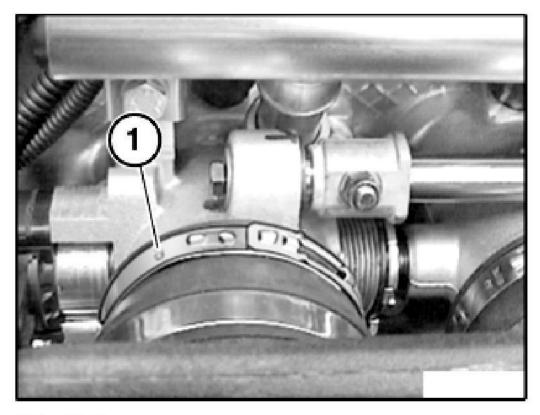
View Of Preassembled Clamps In Installation Position Courtesy of BMW OF NORTH AMERICA, INC.
